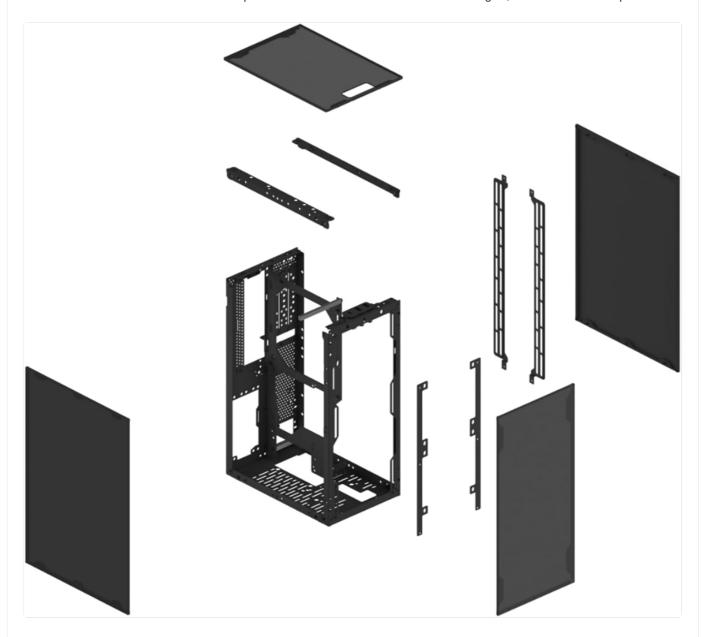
Exploded view illustrating the various components of the Meshroom S V2 case.
